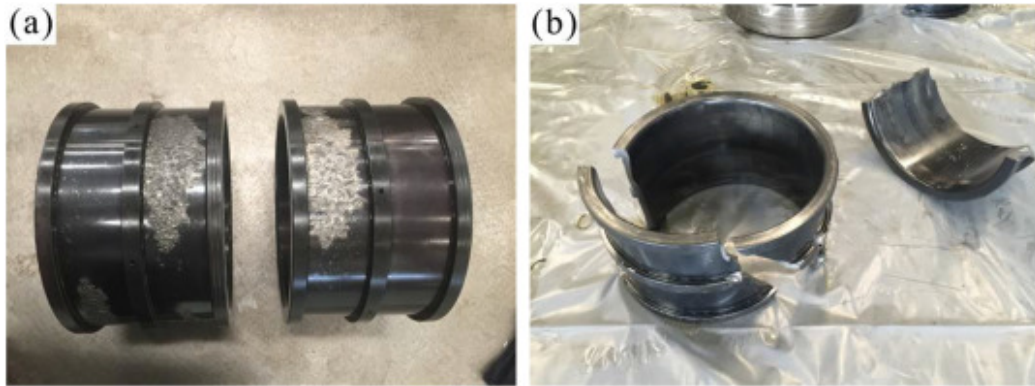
Example failed bearings from a wind turbine gearbox wind turbine. (a) Severely worn and (b) fractured raceways. Reproduced with permission from the publisher [10].
